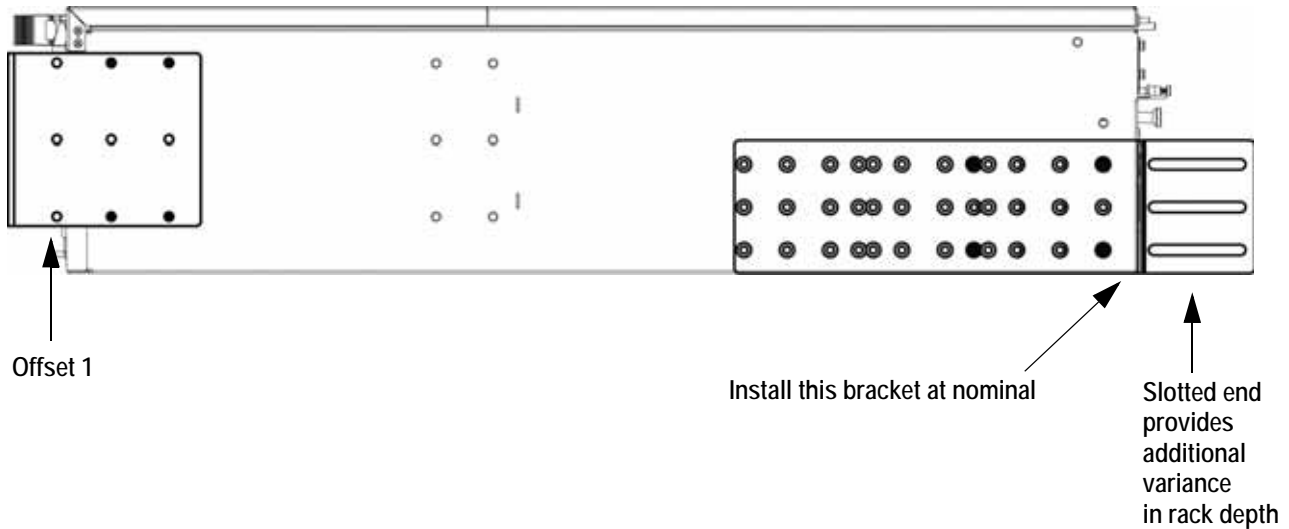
Bracket Mounting for 30" to 31.5" Rack
